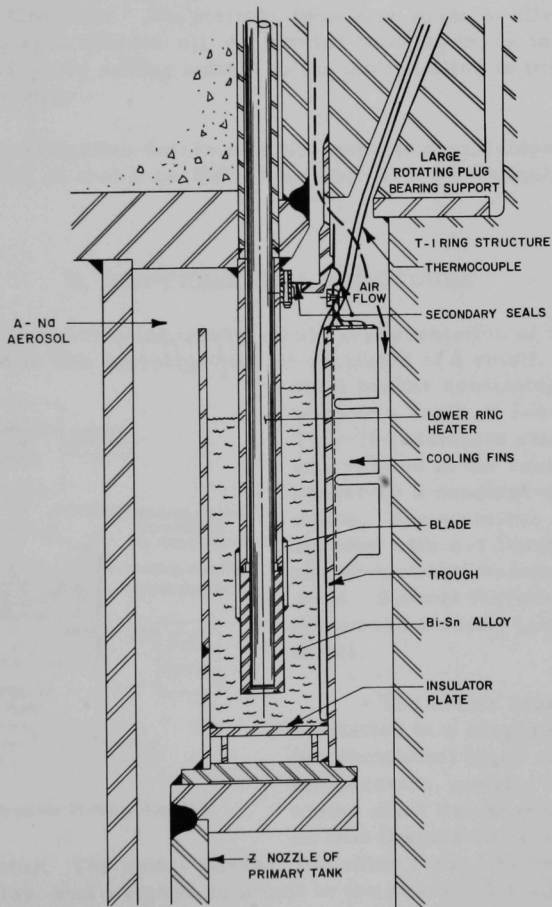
Section through Fusible Seal of EBR-II Rotating Plug
